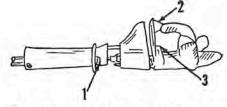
Partially disassembled view of the three-piece lower unit showing location of the two stud nuts (1 & 3) and the retaining screw (2) which hold lower unit together. Refer to text for disassembly
